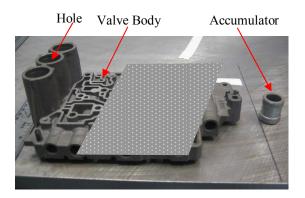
The accumulator and valve body in an automotive transmission. The accumulator is inserted into the hole on the valve body. The radius of the accumulator is 24.96 mm and the inside radius of the hole on the valve body is 25.00 mm with the tolerance about $40 \, \mu m$. Part of the valve body is blocked.
